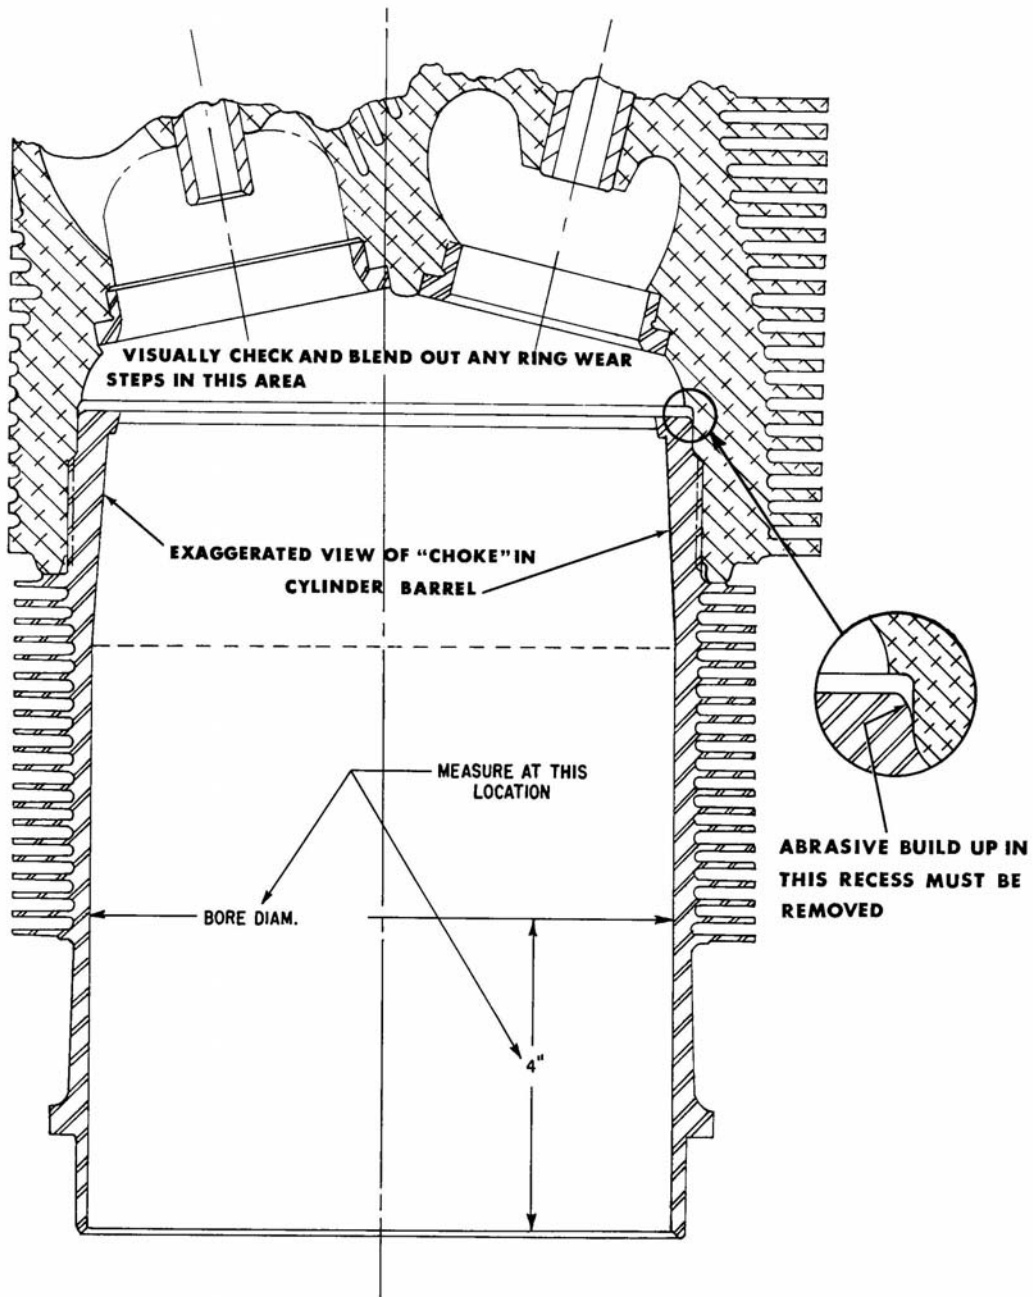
Section Through Cylinder Assembly Showing Locations for Checking Diameter and Removal of Wear Step
